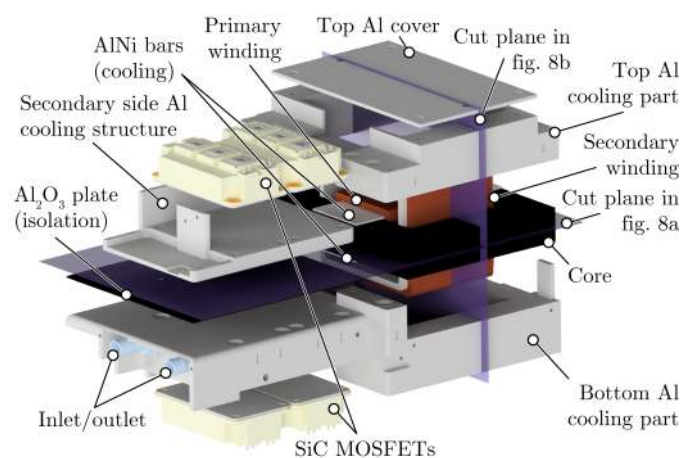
Exploded view CAD drawing of the designed transformer with integrated cooling structure.
